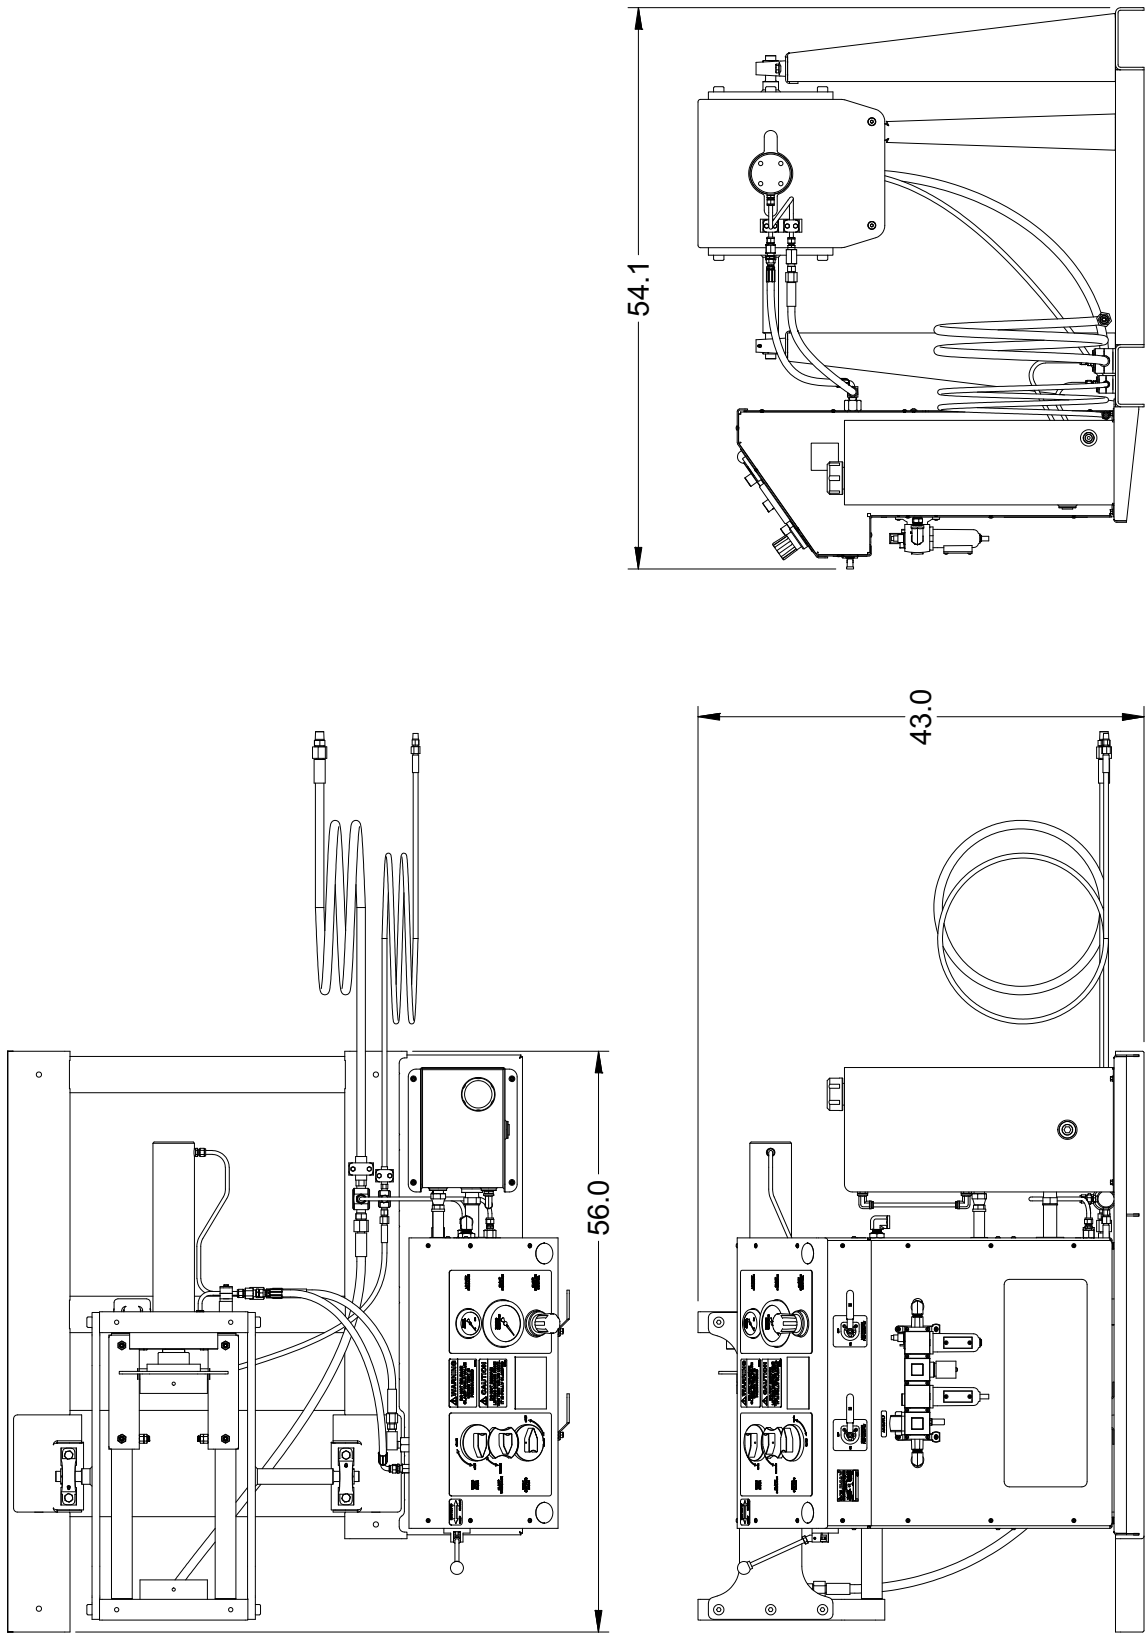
CLAMP FIXTURE DIMENSIONS
